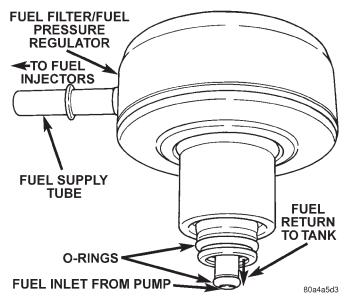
Fuel Filter/Fuel Pressure Regulator
